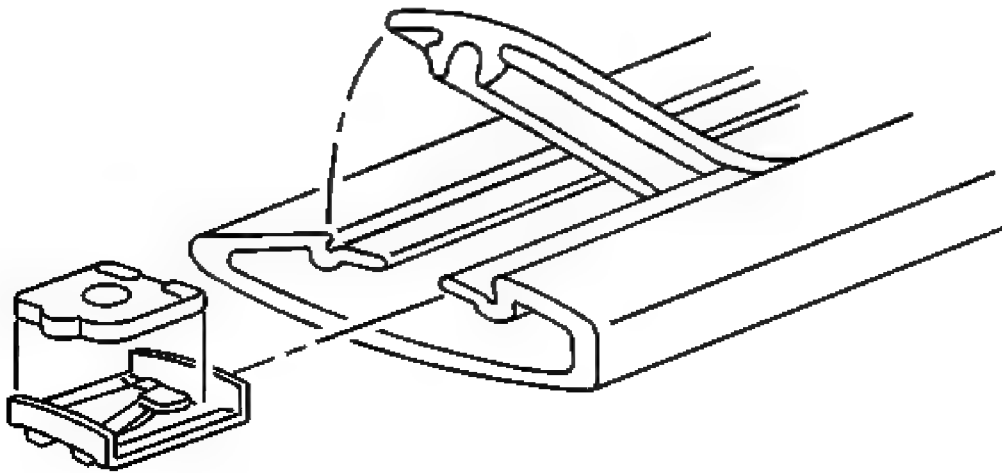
View Of Rubber Strip For Cross Bar Assemblies
